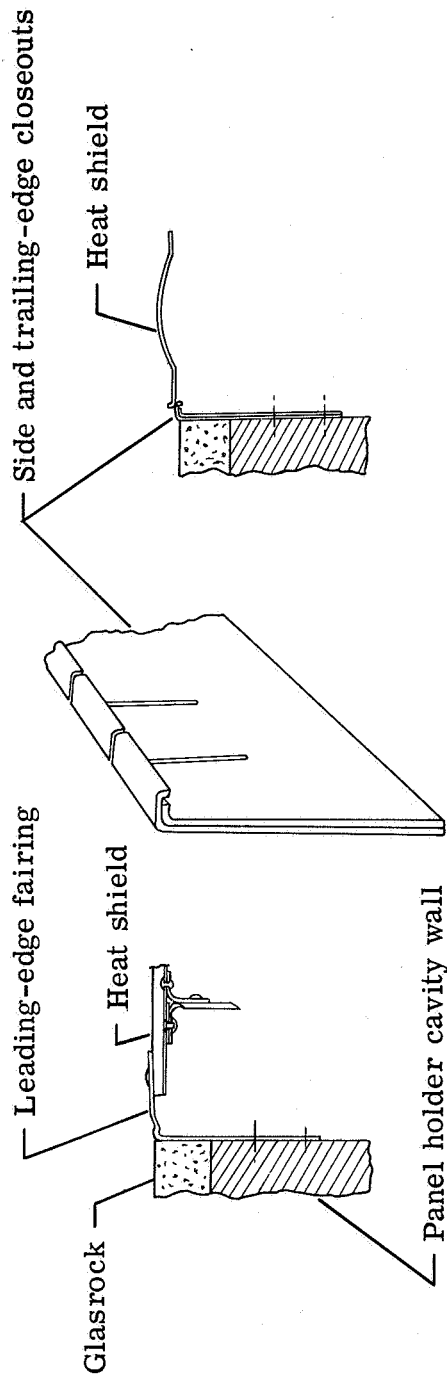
Details of panel holder. Dimensions are in cm (in.).
